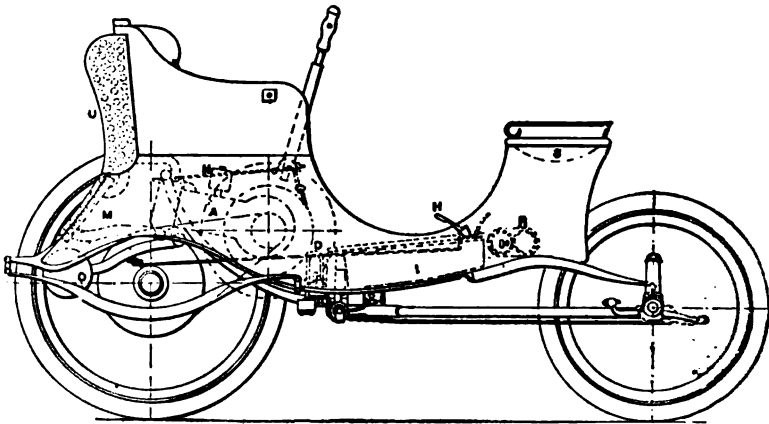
Elevation of the Duryea Three-cylinder Car. A, the motor; D, the magneto generator; H, brake pedal; I, gasoline tank; M, tubular panel for passage of water from tank, V, to water jacket; N, oil cup on motor; O, muffer; R, 6-cell battery; S, extra seat in front; U, cellular water tank, cooled by draft deflected by wings from side of vehicle.
